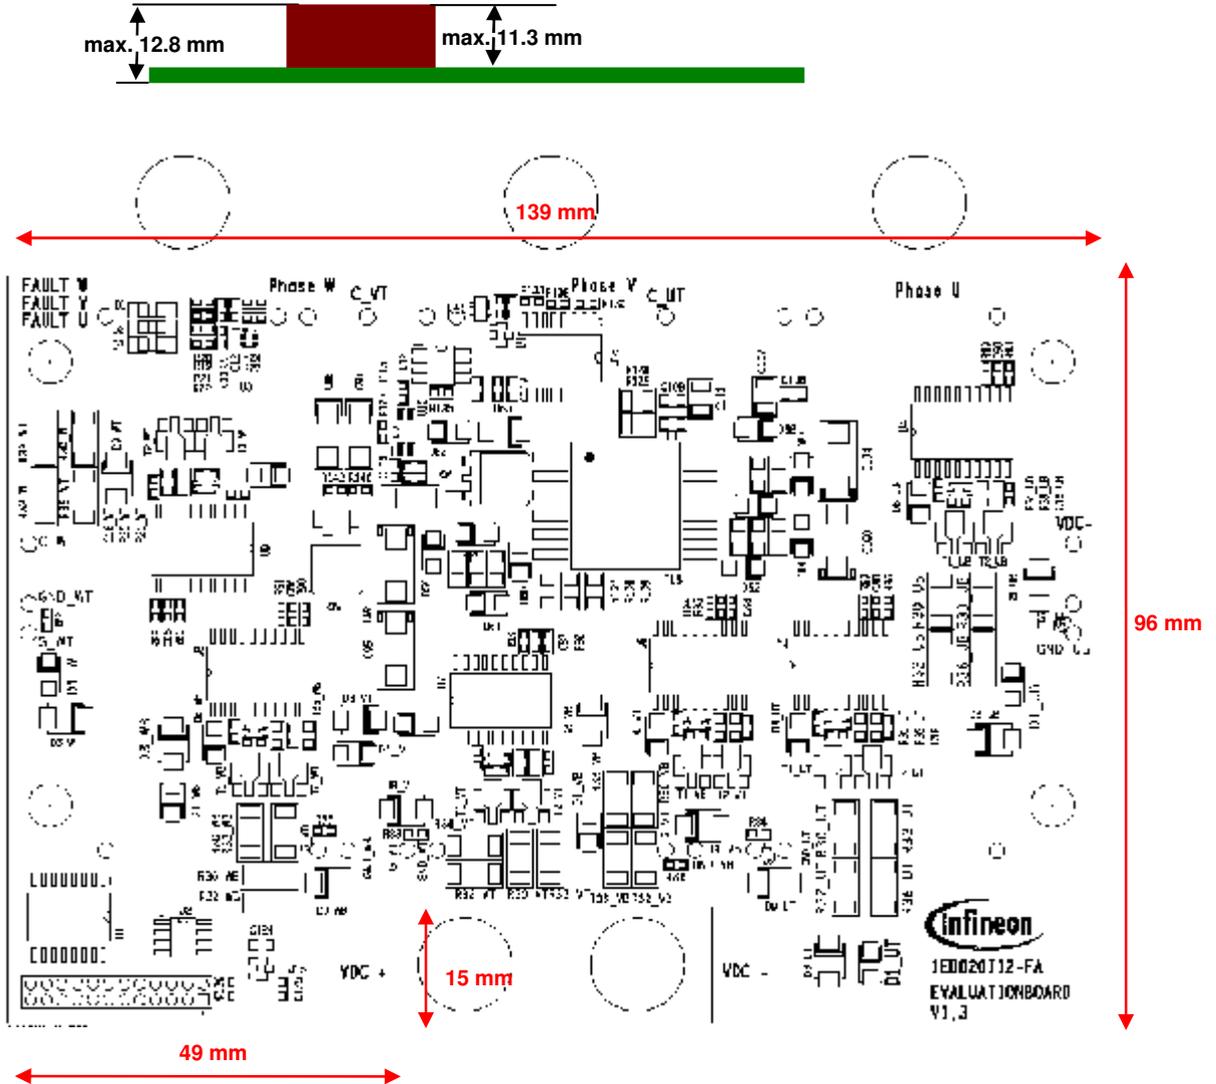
Dimensions of the Hybrid Kit for HybridPACK™1 Driver Board
